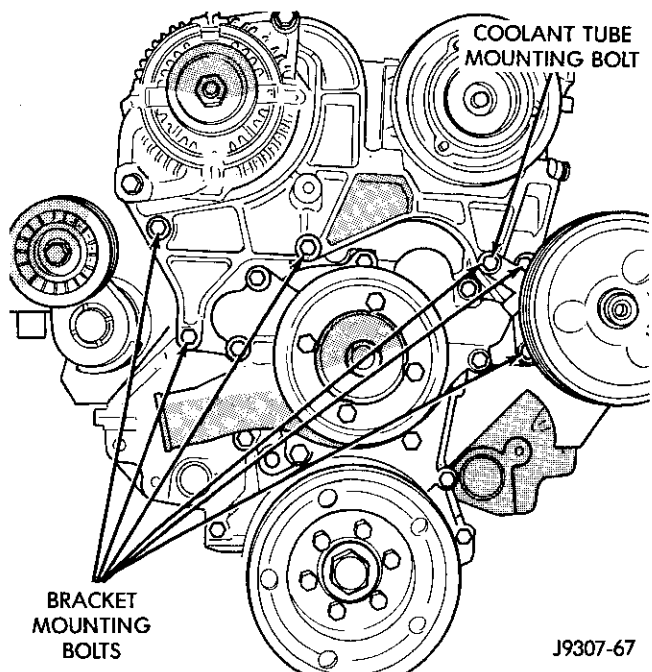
Bracket Bolts—3.9L V-6 or 5.2/5.9L V-8 LDC-Gas Engines
